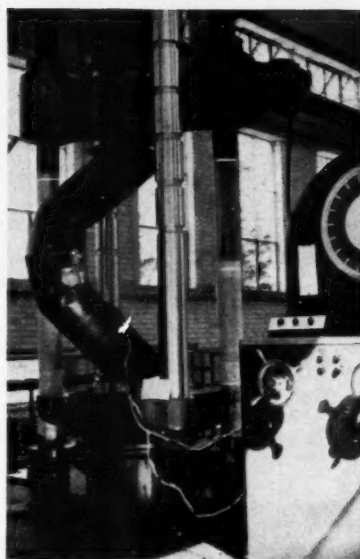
A 12 in. \times $\frac{3}{4}$ in., three-weld gusseted head on test.
